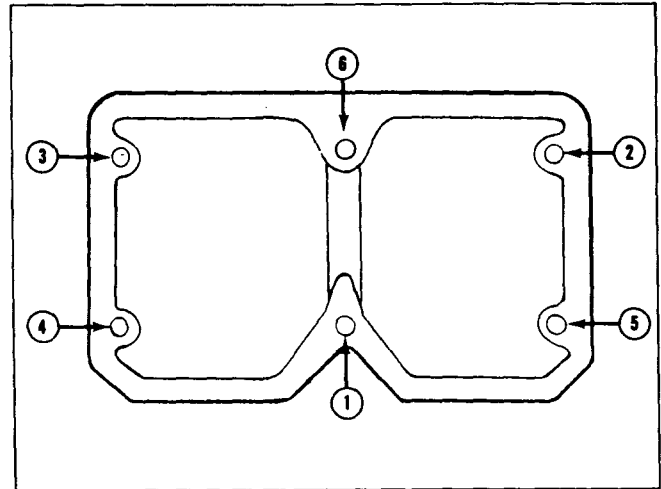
, (N11463). Torquing sequence for rocker lever housing
